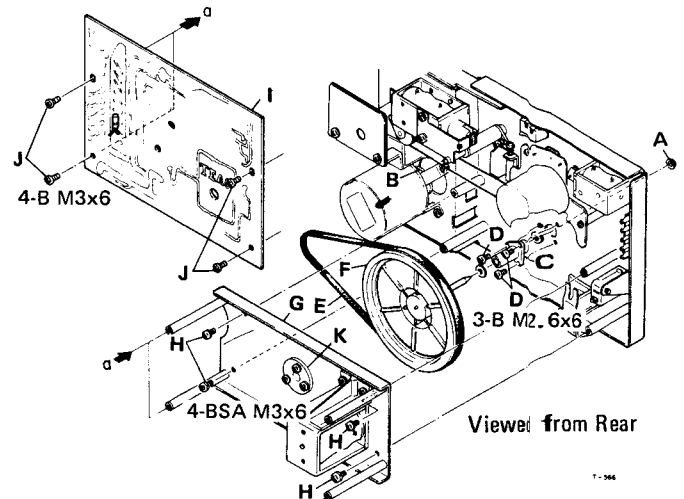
Capstan Drive Ass'y/Drive Belt Replacements
